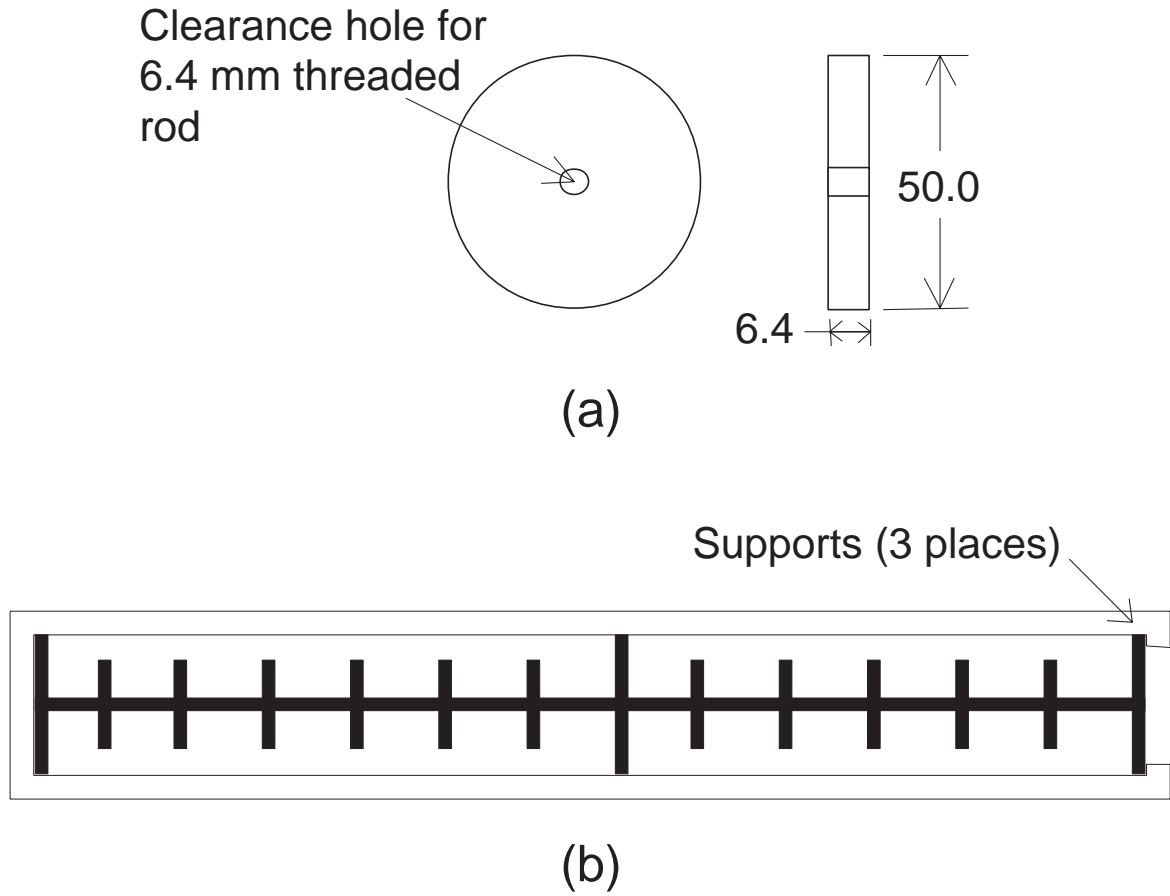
Blockage Plate Obstacles: a) Dimensions of blockage plates in millimeters. b) Arrangement of blockage plates inside detonation tube.
